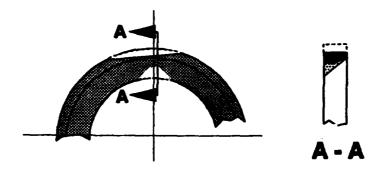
LOCAL REDUCTION IN KRUEGER DELTA SEAL CROSS SECTION CAUSING HEAVY LEAKAGE
